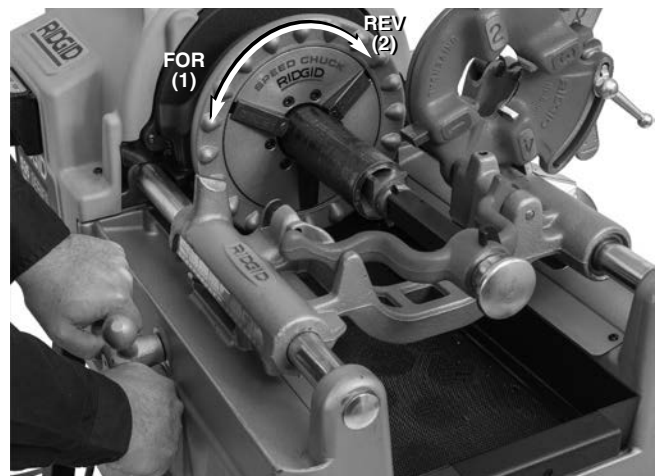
Reaming Pipe with Reamer, Machine Rotation
